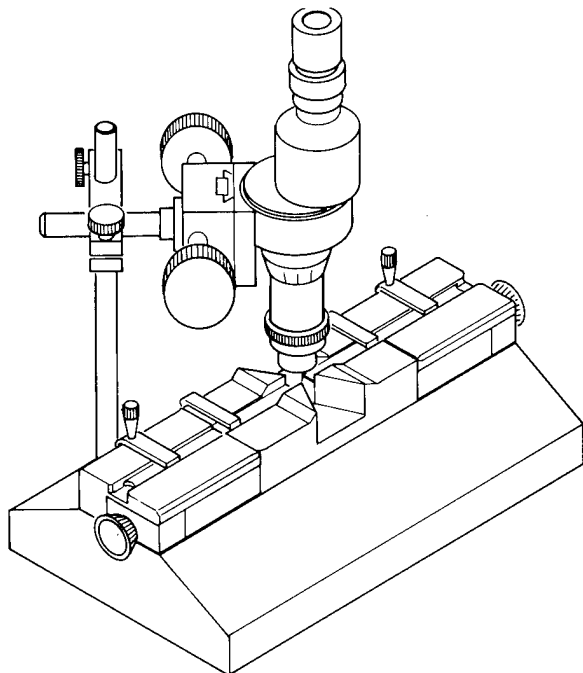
RAPID RIBBON SPLICE ASSEMBLY TOOL
